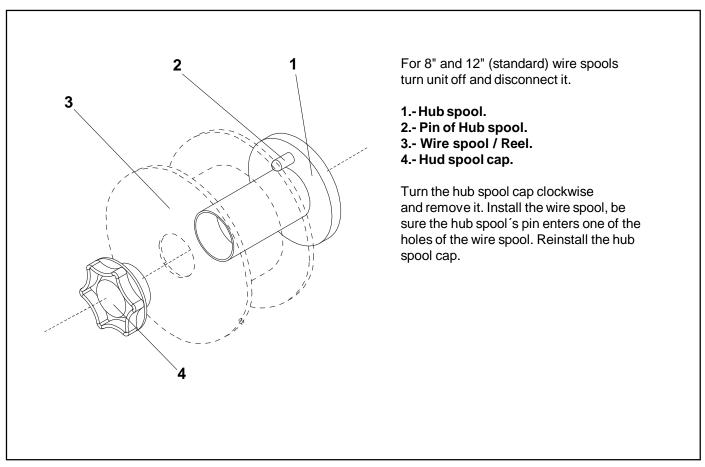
SPOOL WIRE INSTALLATION.
